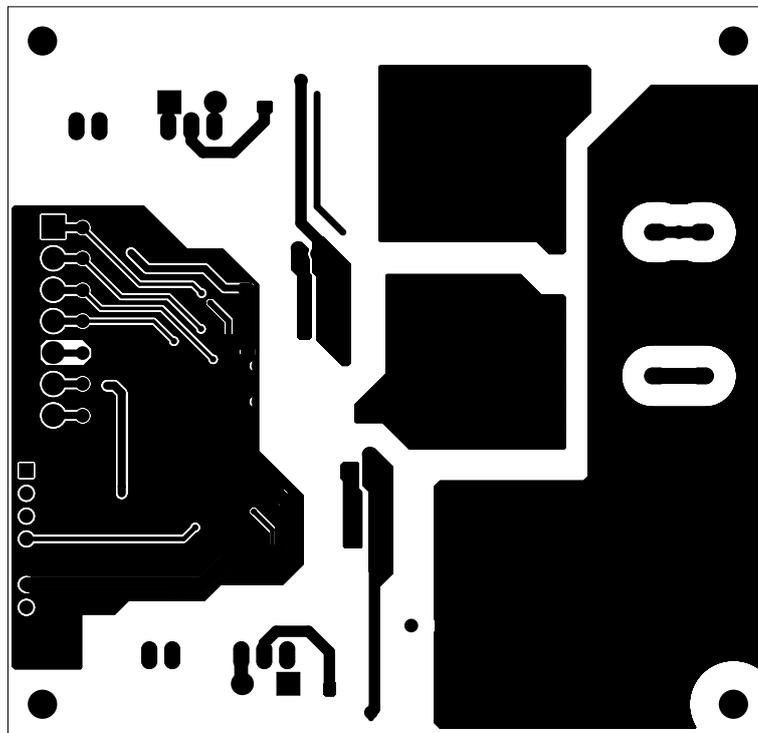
EVSTGAP2SICSN – Layout (component placement bottom view)
